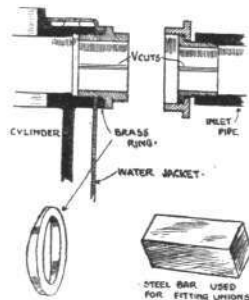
Sketch showing the coupling used for connecting the induction and exhaust-pipes to the cylinders on the Green engine.
